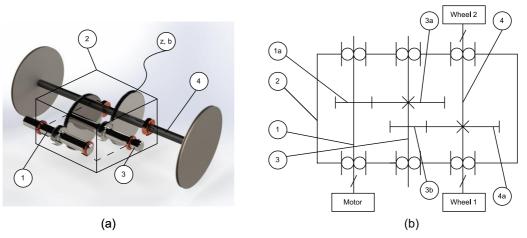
Two-stage gear box (a) CAD drawing and (b) sectional view
